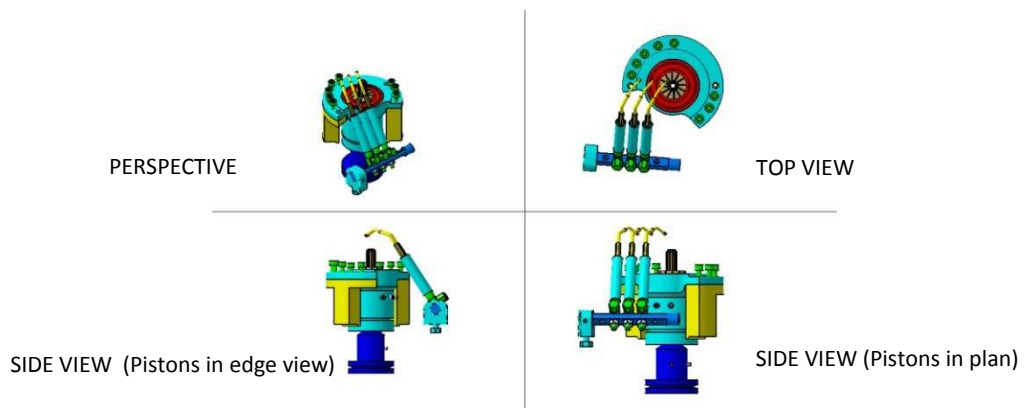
Different views of the circular knitting head and the thread switching guides. This picture is prepared on Catia.
